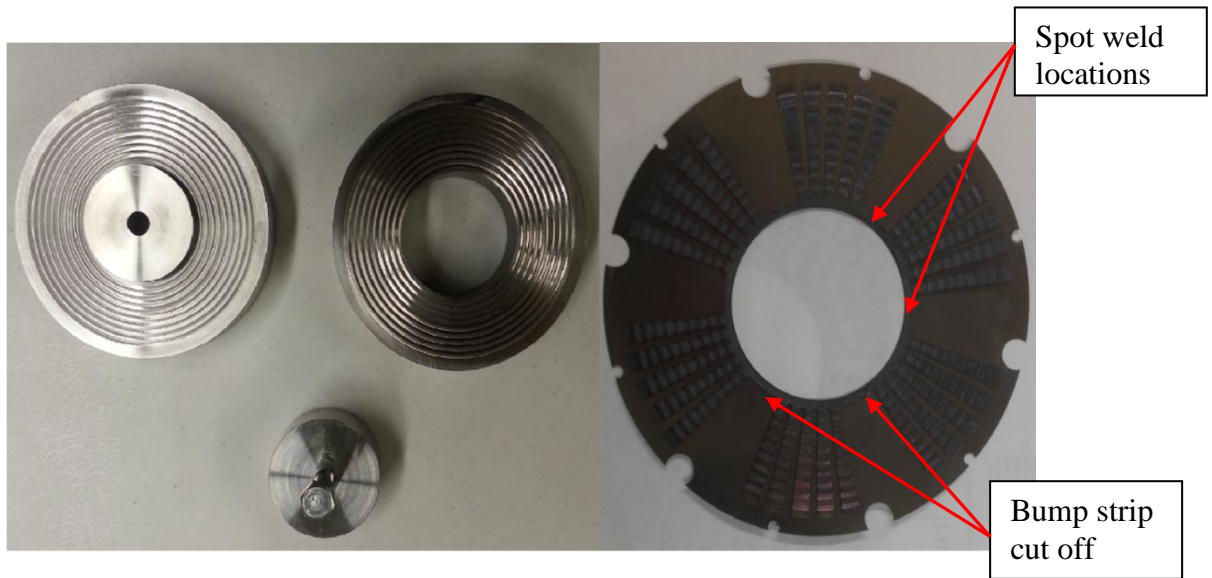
Bump foil Jig (left) and bump foil spot welded (right)
